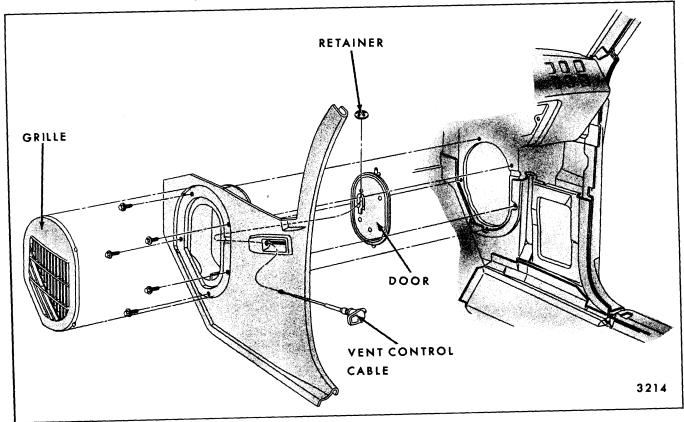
Shroud Side Finishing Panel - "X" Styles
